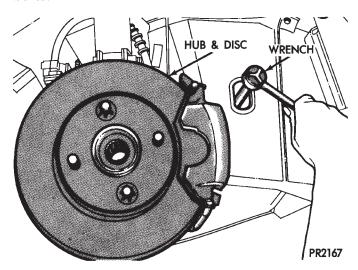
Remove or Install Access Plug in Right Splash Shield to Rotate Engine Crankshaft
